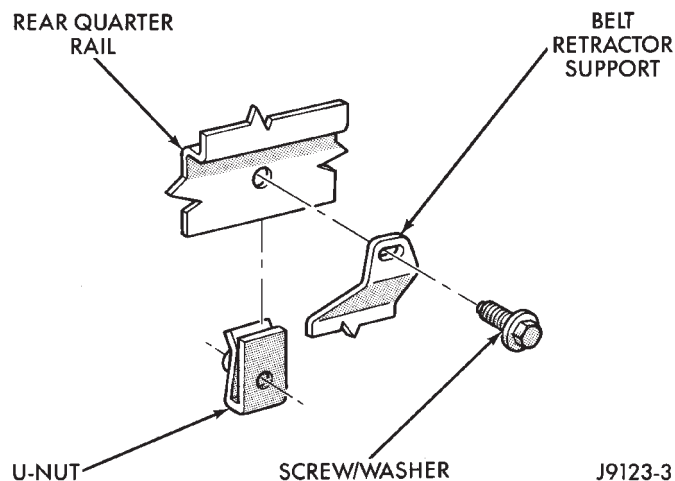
Shoulder Belt Retractor Support Removal/Installation
